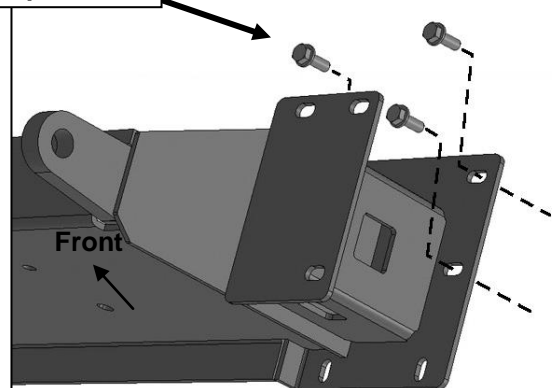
Reuse factory bumper bolts to attach Winch Tray Bracket Assembly to end of frame
